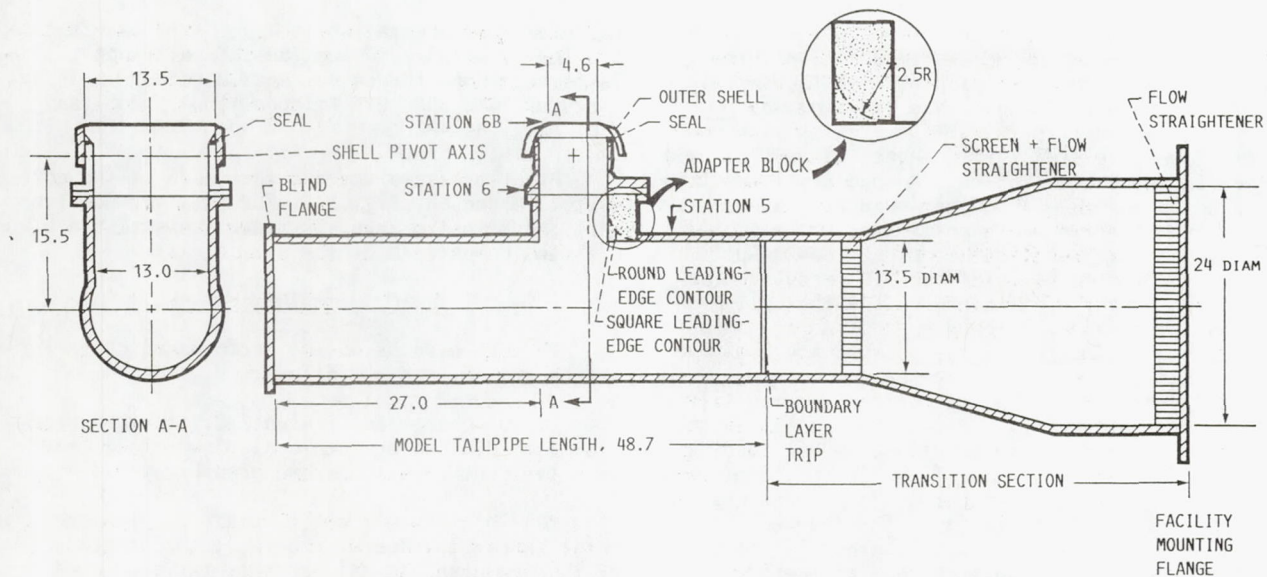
CROSS SECTION OF SWIVEL NOZZLE AND TAILPIPE ASSEMBLY. (DIMENSIONS ARE IN INCHES.)
